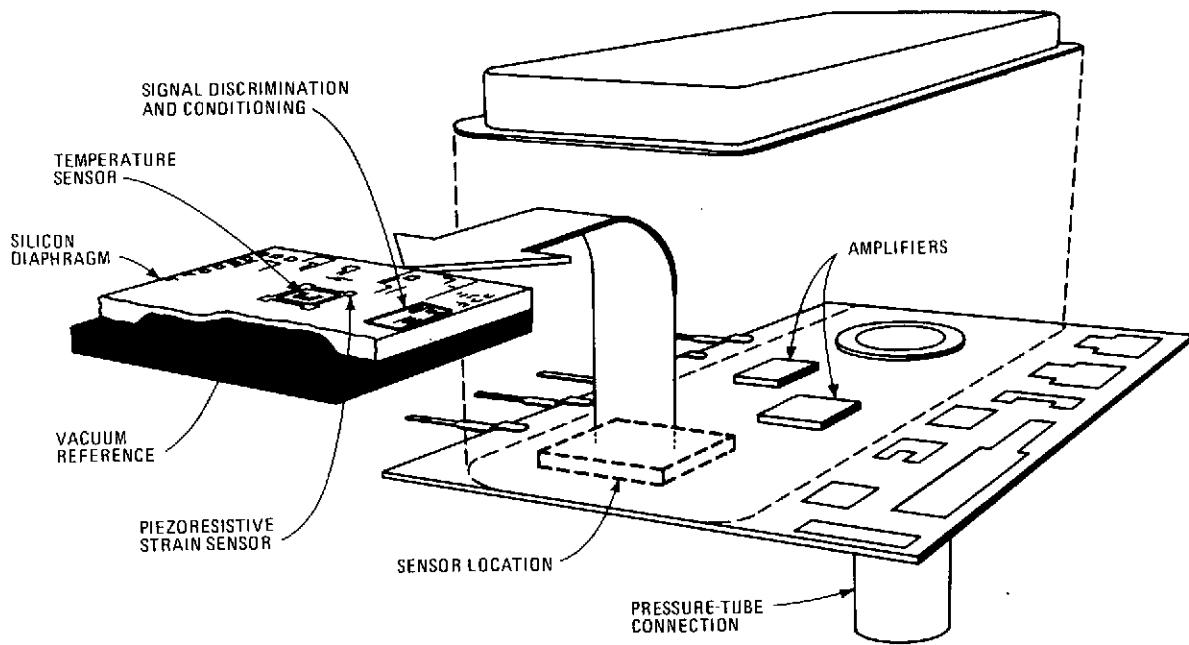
Exploded View of Absolute Pressure Sensor
